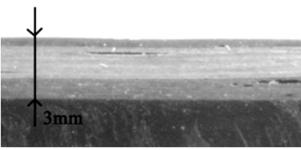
Cross-section of composite pipe, 3mm wall thickness
